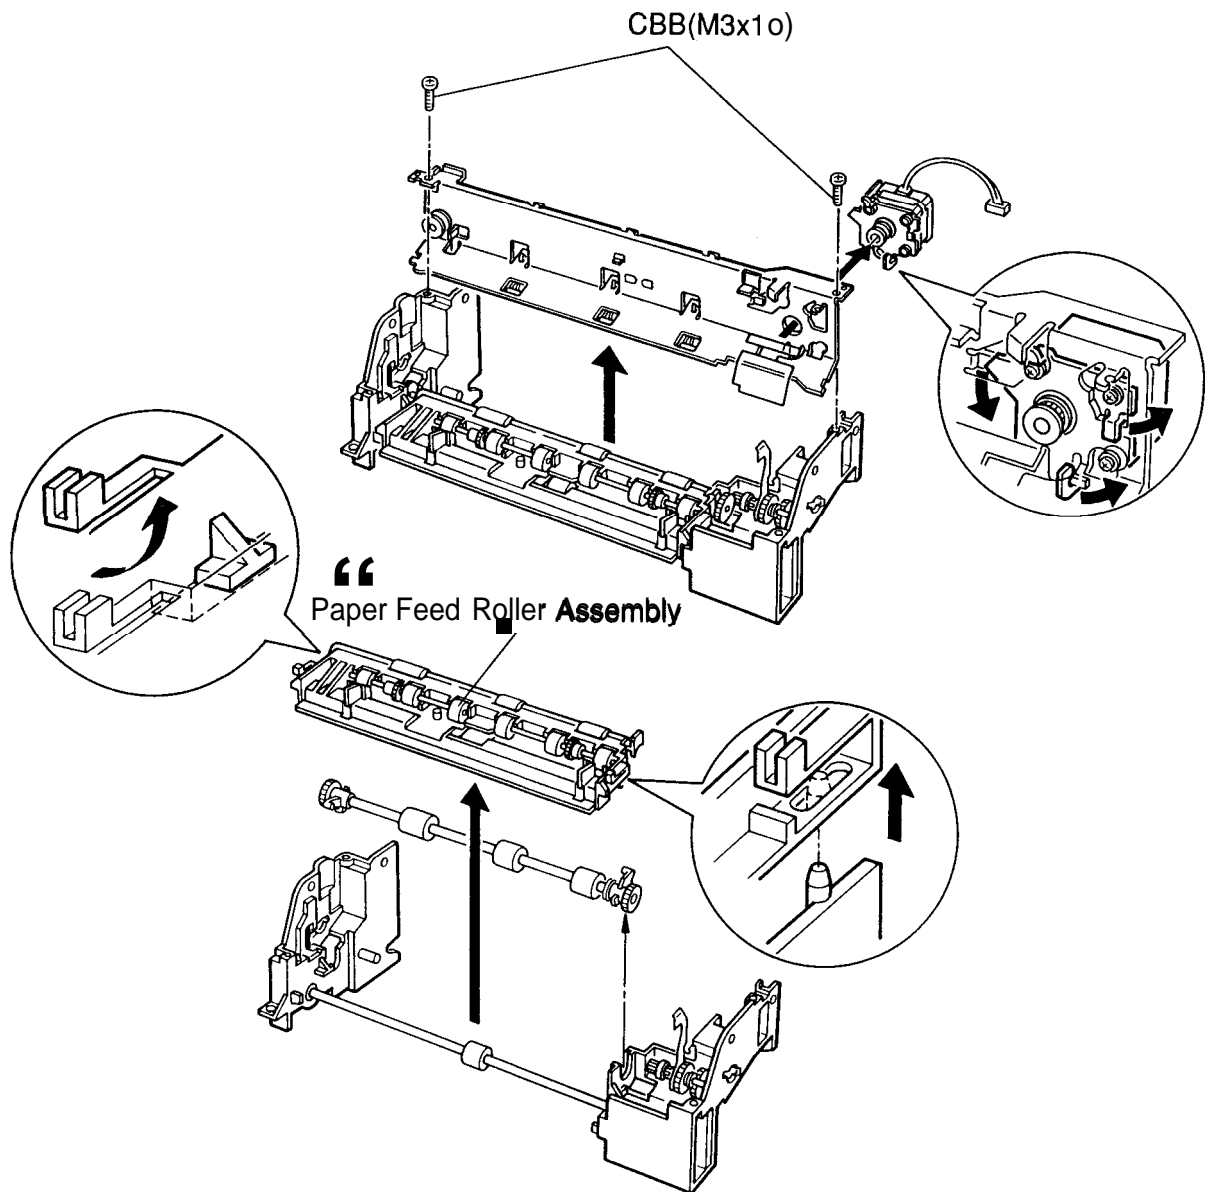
PAPER FEED ROLLER ASSEMBLY Removal
